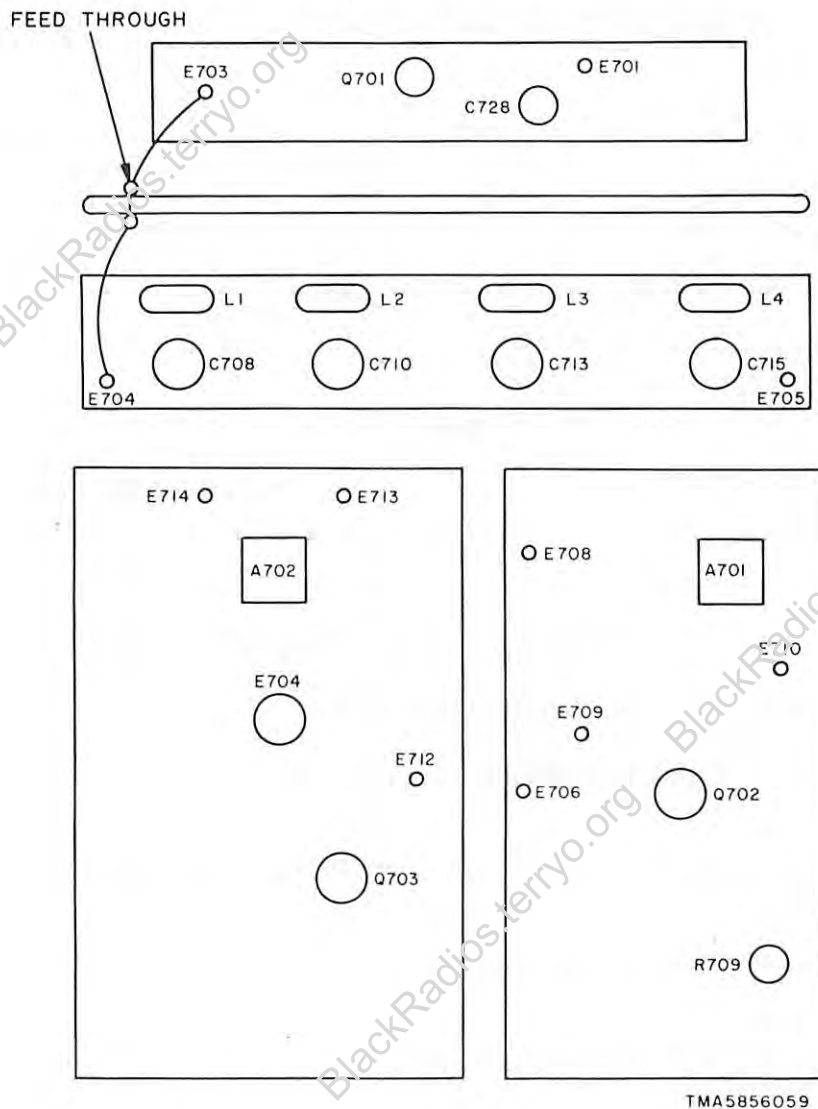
37.5 MHz GENERATOR ALIGNMENT PARTS LOCATION
